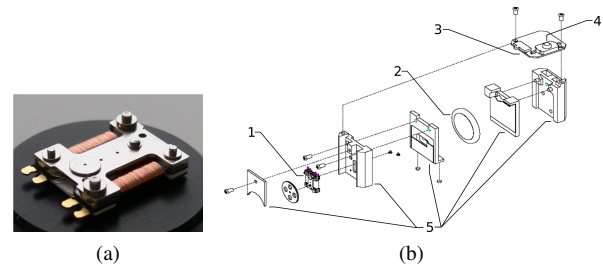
On the left a close-up picture of the step motor, on the right an exploded view of revealing the robot parts.
